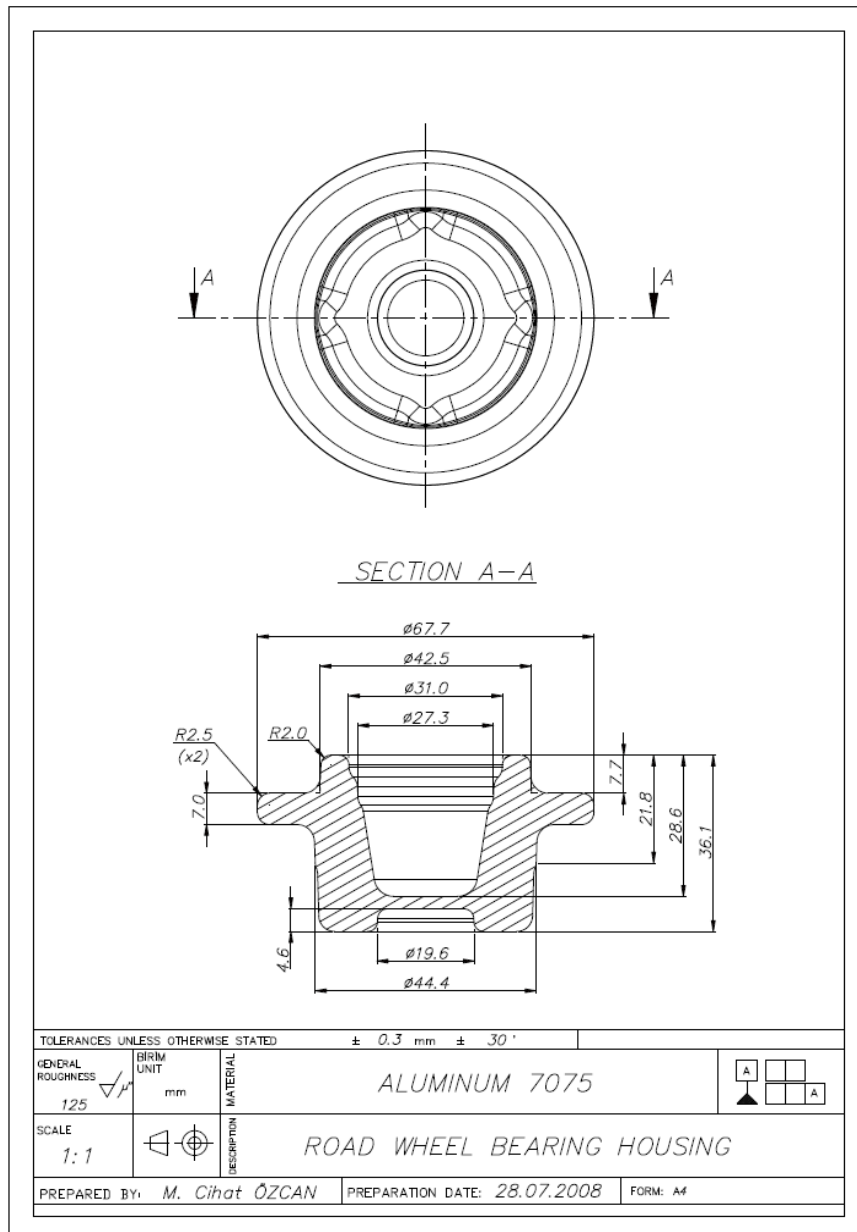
Engineering Drawing of the Road Wheel Bearing Housing
